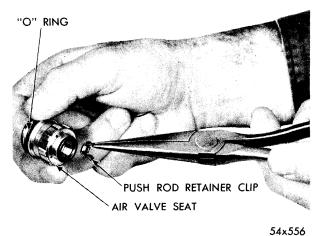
Removing Guide Assembly from Power Piston Assembly
